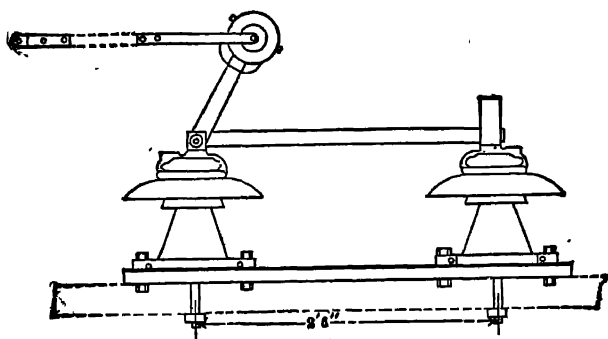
60,000-VOLT DISCONNECTING SWITCH.
